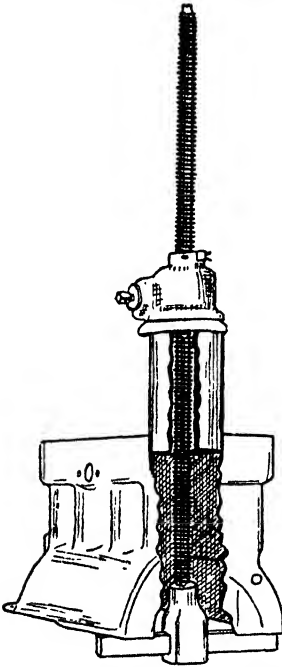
Illustrating method of inserting Cylinder Liner.
